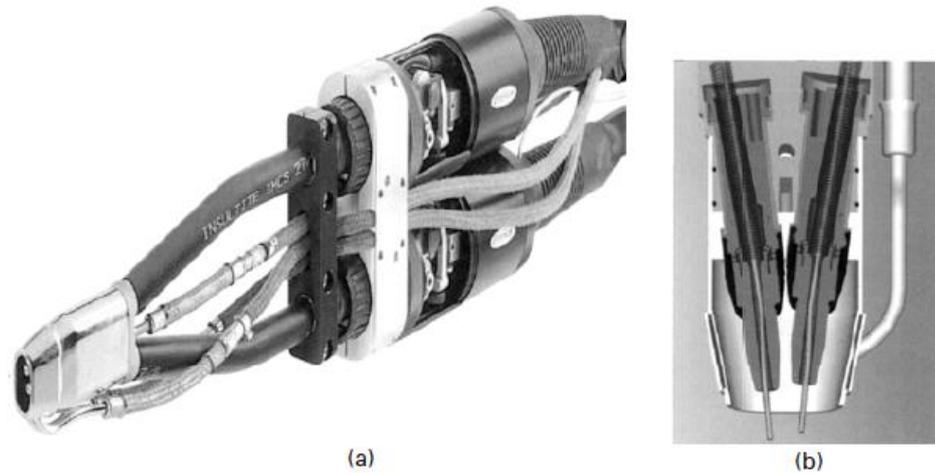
Tandem GMAW torch view (a) and cross-section (b) [31].
